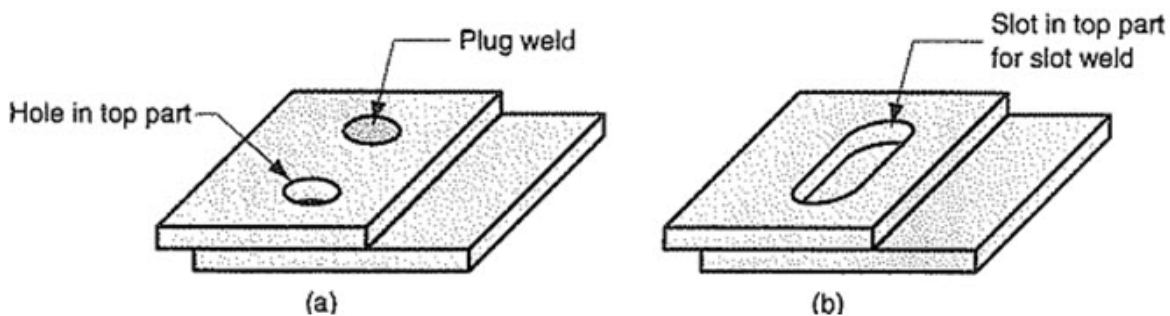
(a) Plug weld, and (b) slot weld.
